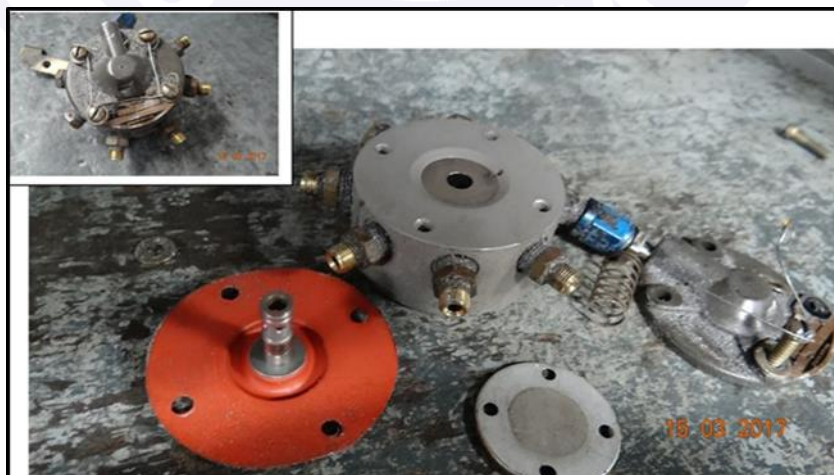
Disassembled distributor view. Highlighted the distributor assembled.
